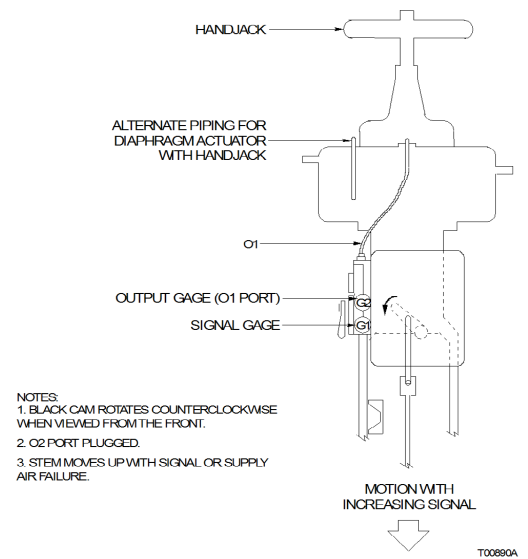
Direct Acting, Top Loaded, Single Acting Tubing Example
